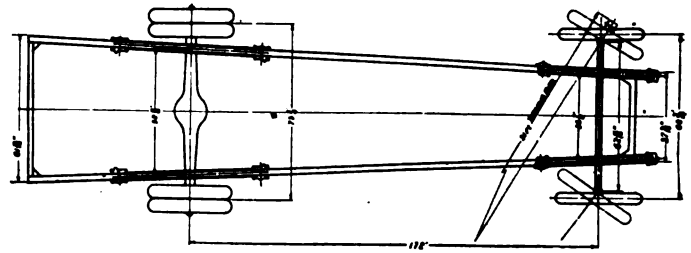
CHASSIS DIMENSIONS OF THE 29-PASSENGER SINGLE-DECK BUS
